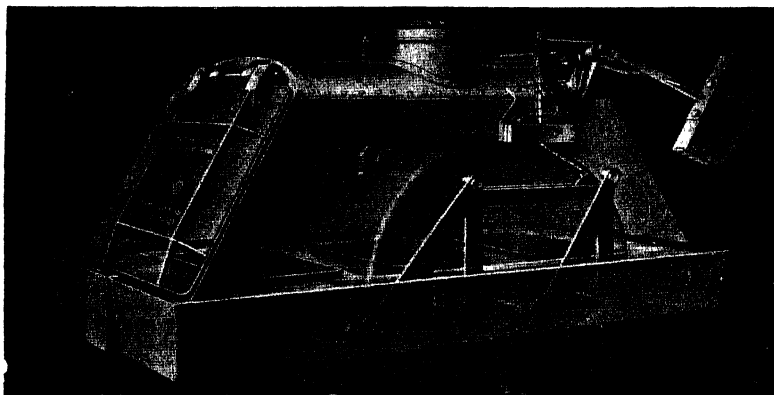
III.—Phantom view showing general design and construction of W-S-M gas reversing valve. (Courtesy of the Wellman Engineering Co.)
